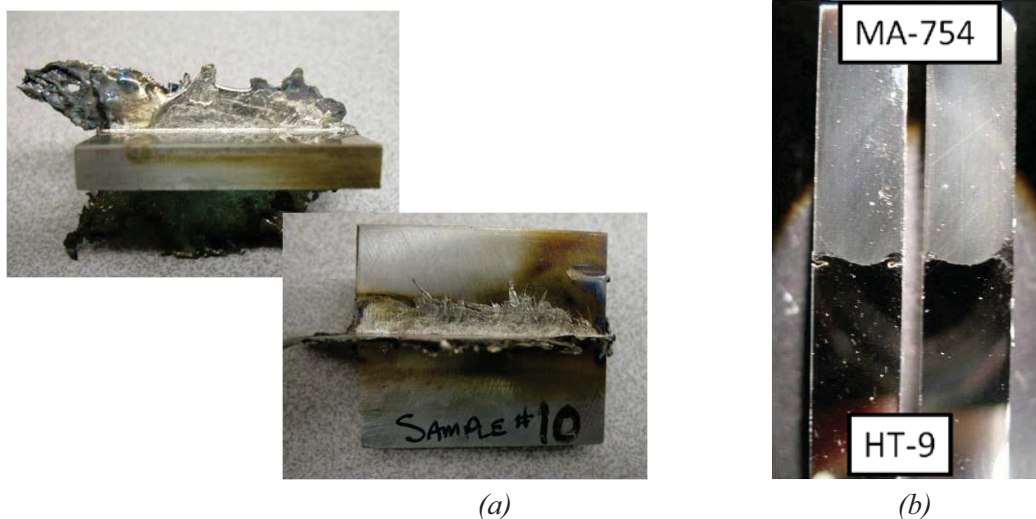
Macro-images of HT-9 to MA-754 joints created by pressure assistance welding. a) As-received joint showing the “flash” material. b) The polished cross section of the samples showing the HT-9 and the MA-754 sides of the joint and the profile of the weld.
